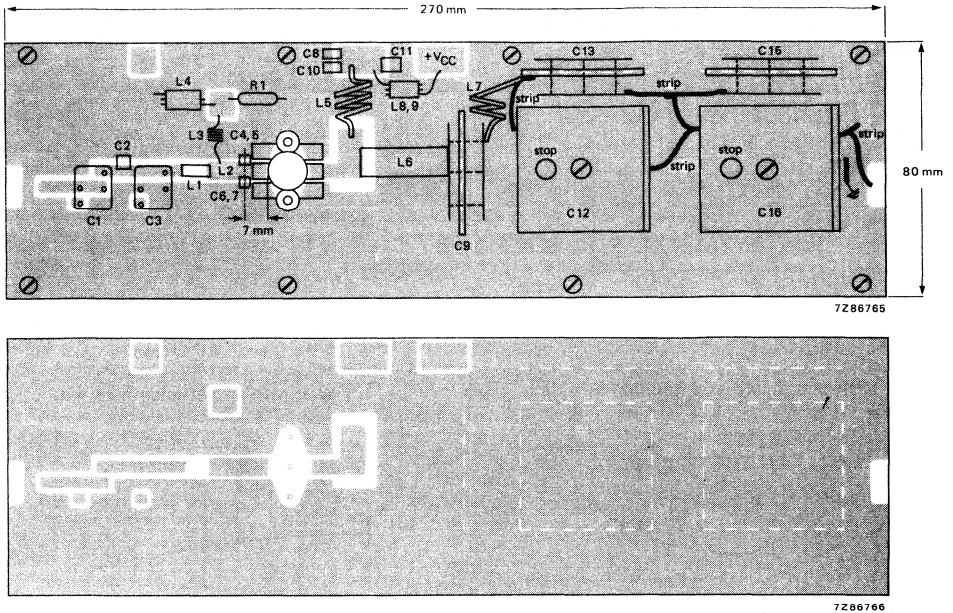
Component layout and printed-circuit board for 108 MHz class-B test circuit. (Dimensions in mm.)
